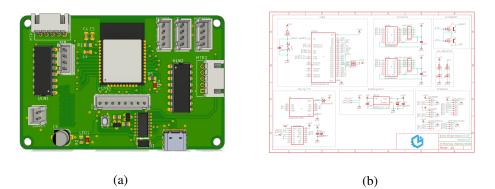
PCB design (a) board layout in 3D and (b) electrical schematic
